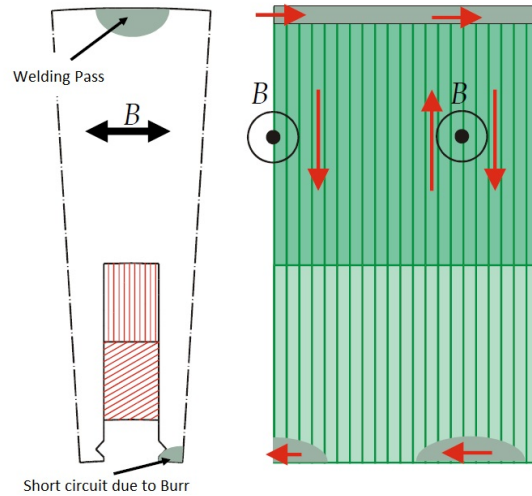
Stator lamination showing welding and pressing locations [5]
